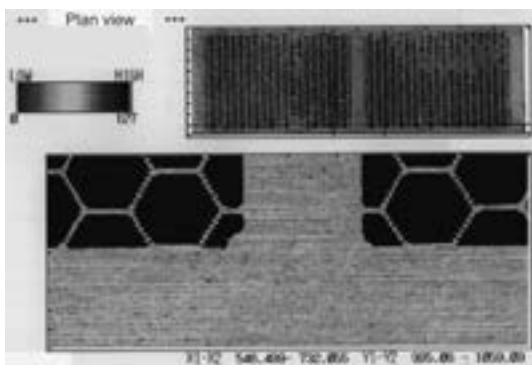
Ultrasound inspection result of brazed honeycomb panel for series 500 Shinkansen.⁶⁹⁾
